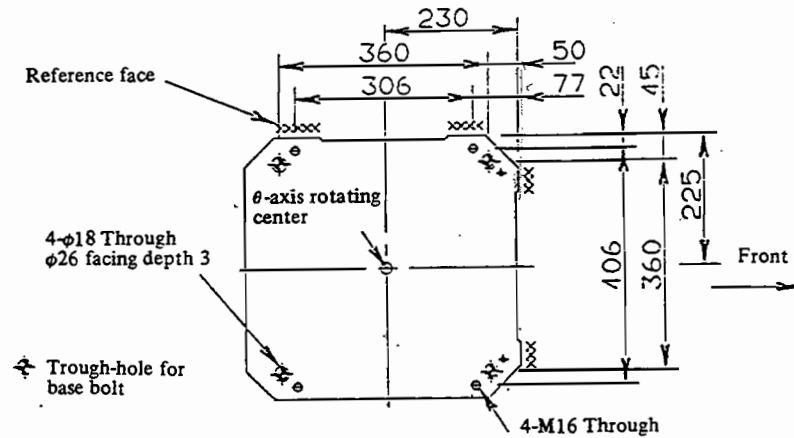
(a) Dimensions of robot base (S-10)
